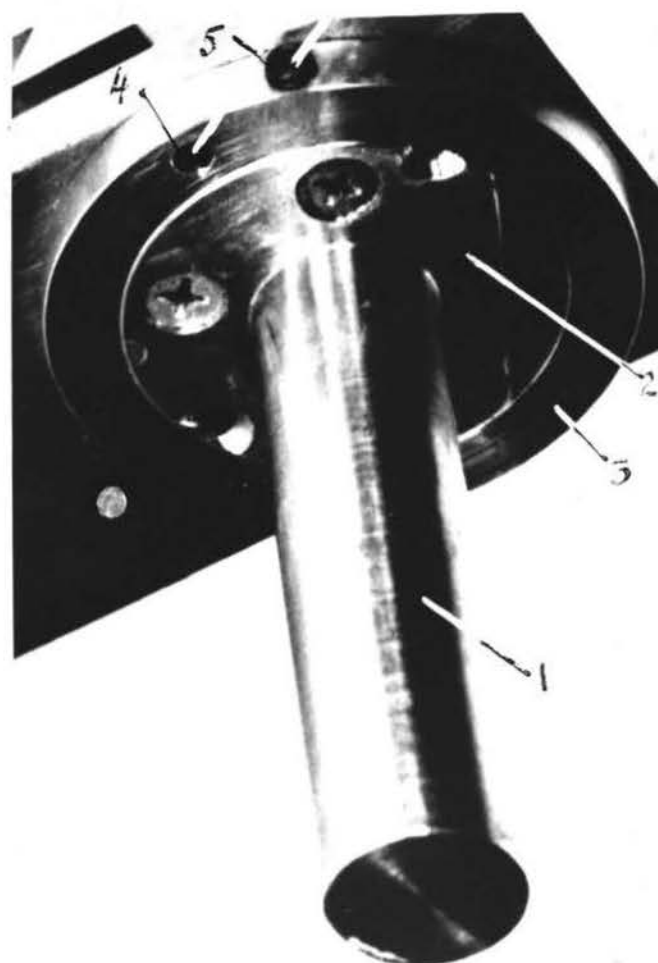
Mounting standard of the 'spherical specimen mount'.
